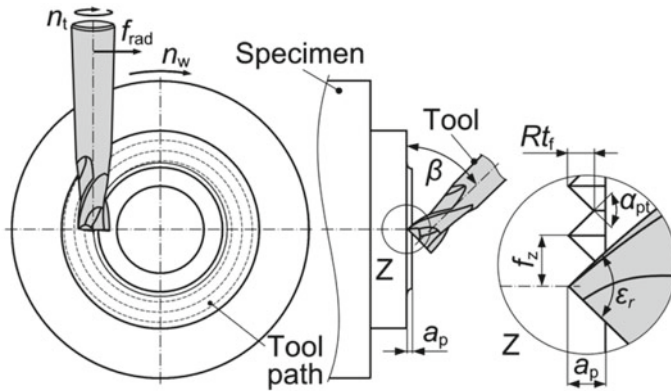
Kinematics of turn-milling and resulting roughness profile using the example of a sharp corner geometry
